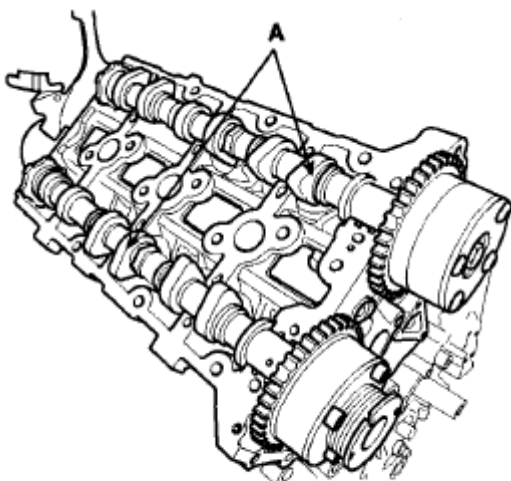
Identifying Camshaft Bearing Cap And Thrust Bearing Cap (2 Of 2)
